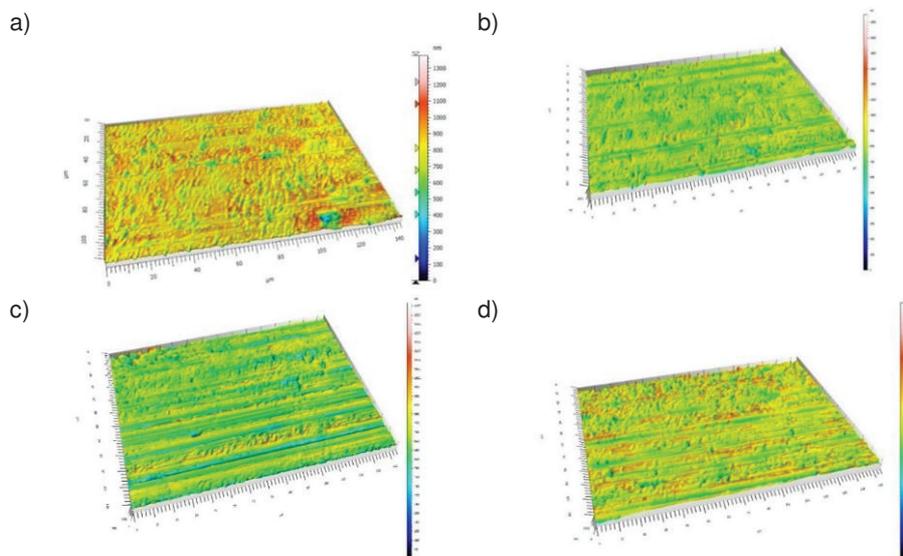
The view of surface topography for shaft after a) 1 pass of burnishing tool b) 2 passes of burnishing tool c) 3 passes of burnishing tool d) 4 passes of burnishing tool
